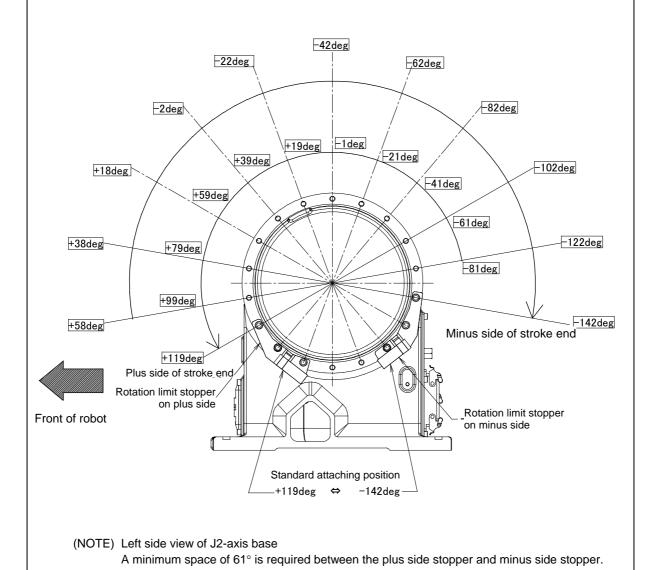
(b) Attachment of J2-axis movable mechanical stopper
